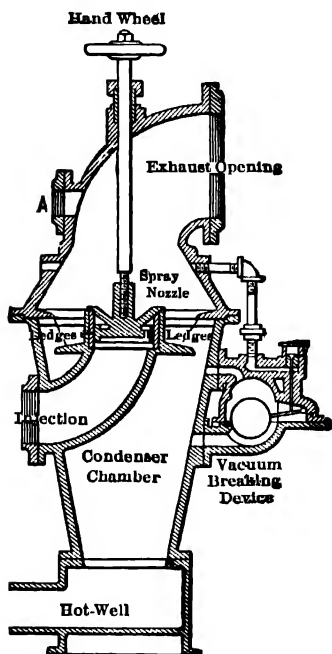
Section through Condensing Chamber of a Low-level, Low-vacuum Jet Condenser with Vacuum Breaking Device.
